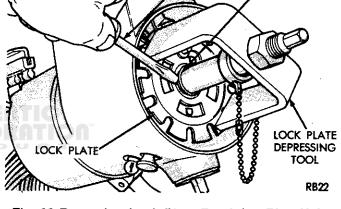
Removing Lock Plate Retaining Ring Using Tool C-4156
